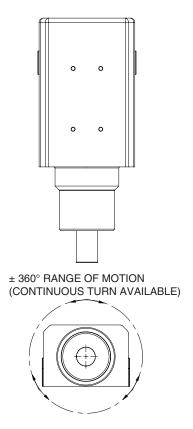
LT1 (Theta) Module with Standard Shaft/Range of Motion
